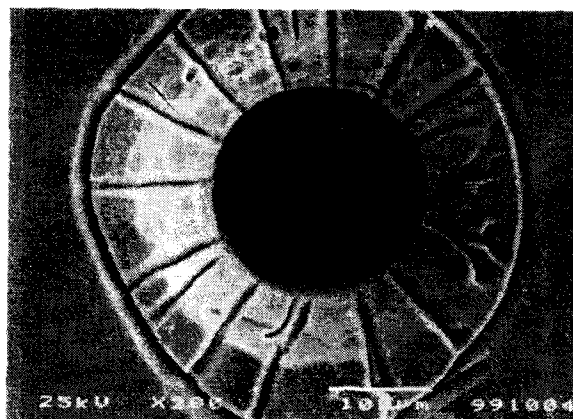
SEM photograph of laser drilled hole after polishing of surface covered with slag
